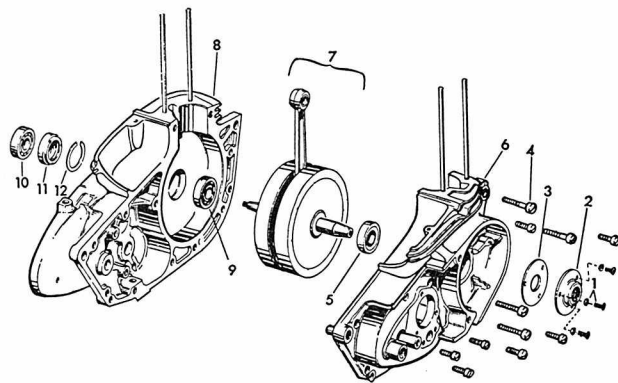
Exploded view of the engine crankcase. Refer to Fig. HD2-10 for an exploded view of the flywheel and connecting rod assembly.
